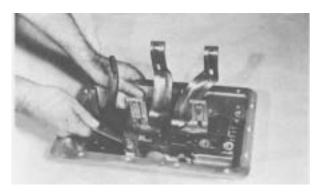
Install rail support capscrews and washers. Tighten capscrews slightly.
